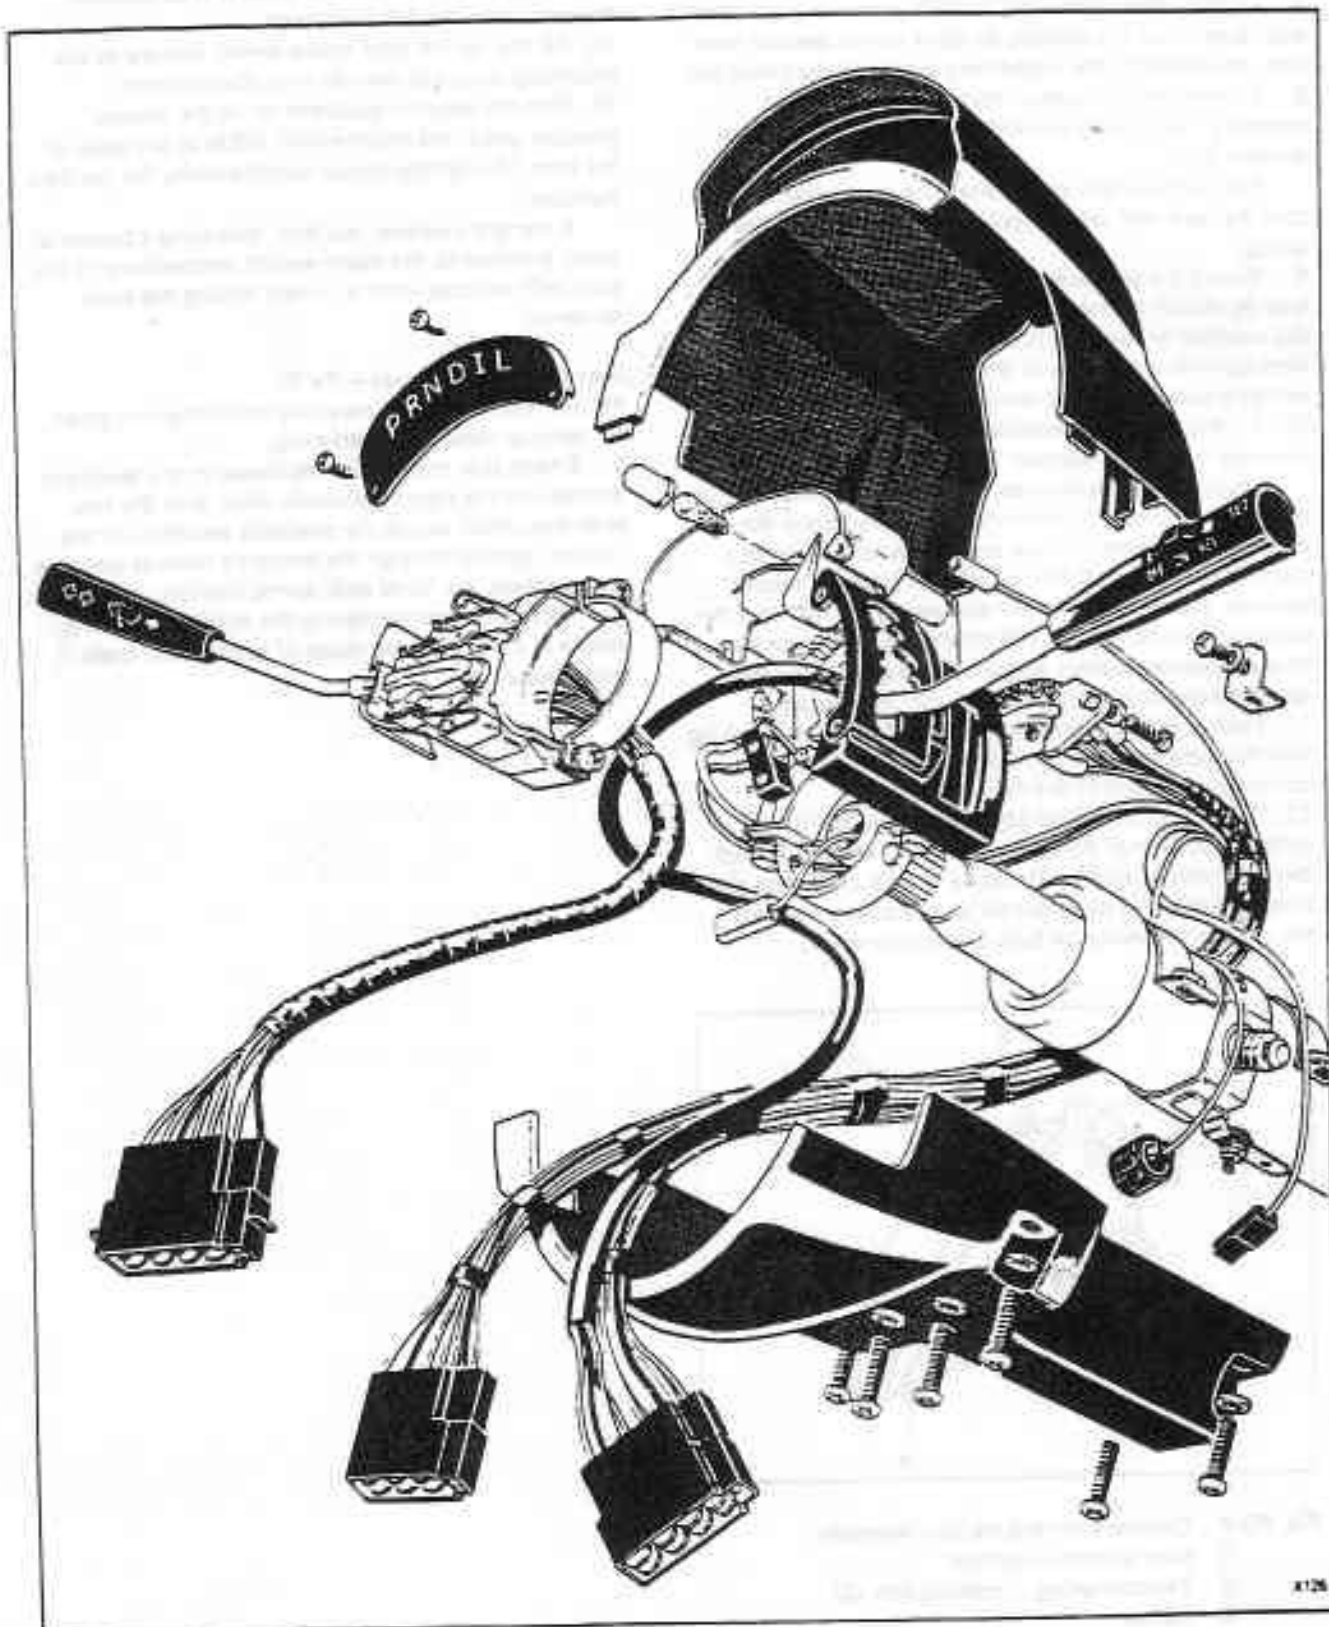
Gear range selector, direction indicator, wash/wipe units, upper and lower cowlings
